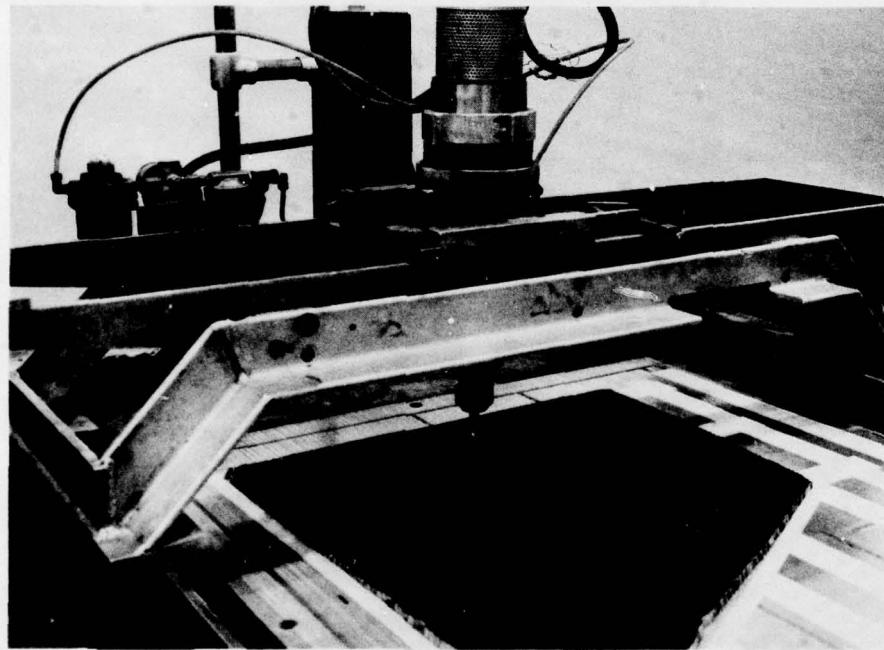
Machining the Core With the High-Speed Surfacing Machine
